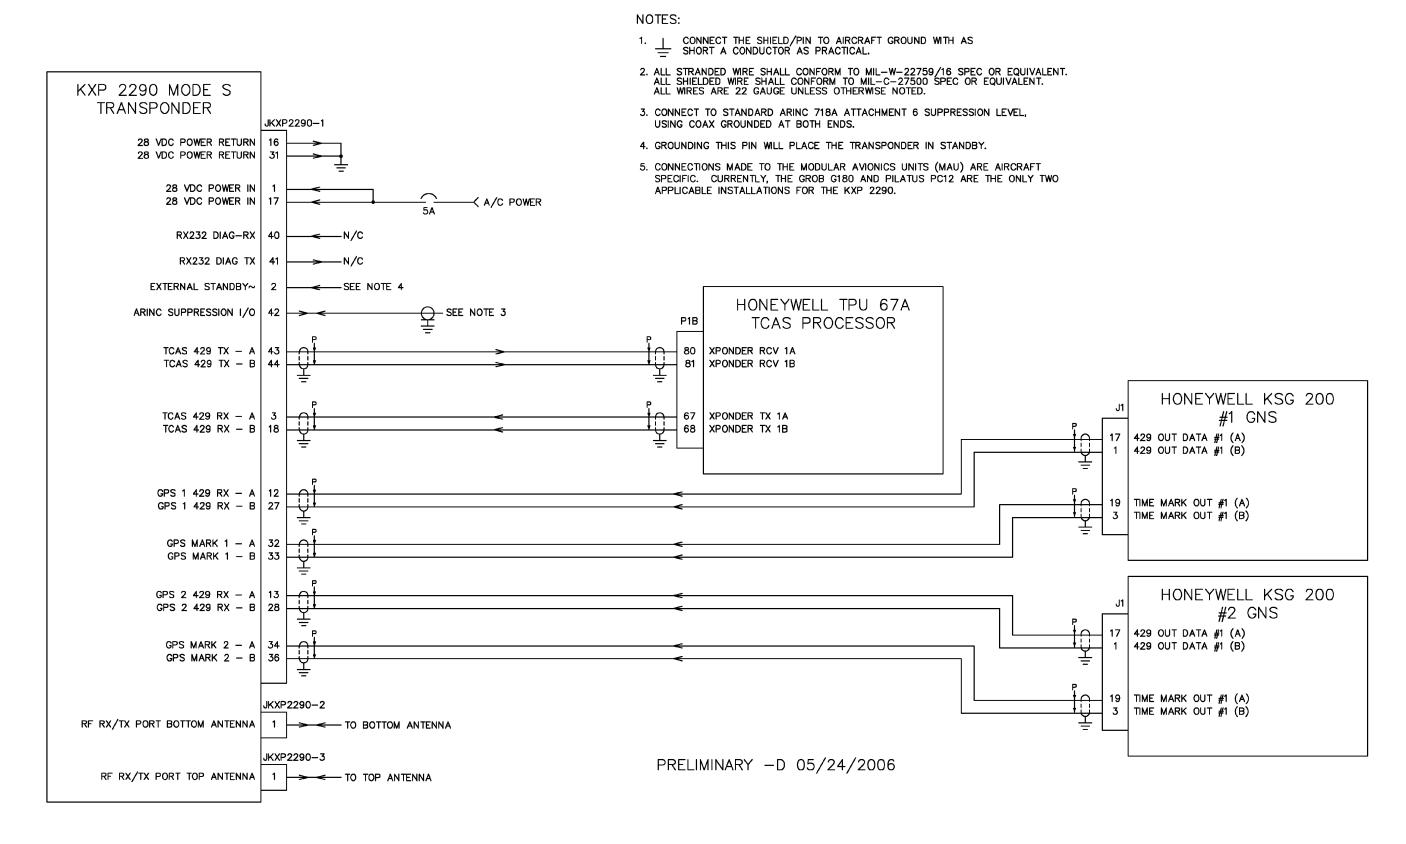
KXP 2290 INTERCONNECTION DRAWING (Dwg. 155-0xxxx-000x Rev. -, Sheet 1 of 2)
